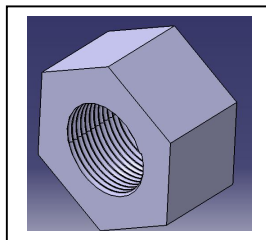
Nuts to secure and fasten Screw clamps, frame bolts and other
